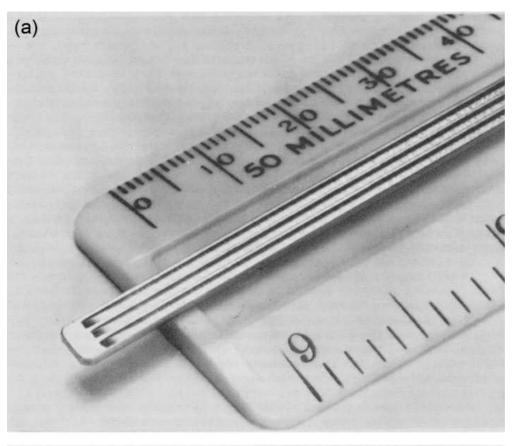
Grooved wick in a copper tube, obtained by mandrel drawing
